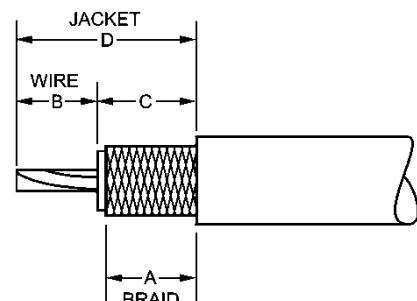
Stripping Dimensions for Coaxial Cable in Table 10-27
